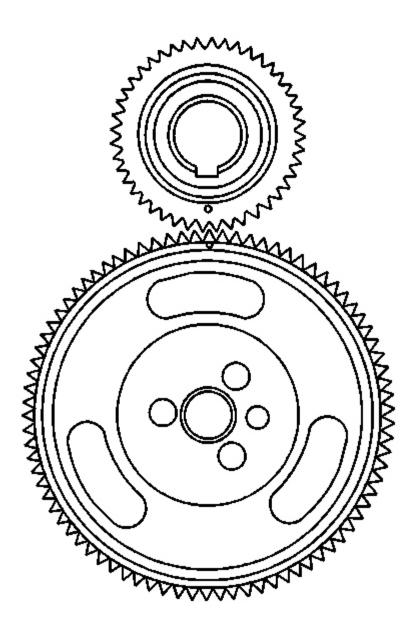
Aligning Balance Shaft Drive Gear & Balance Shaft Driven Gear Timing Marks
